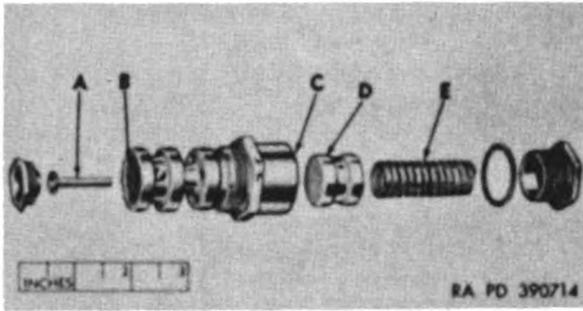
Repair and rebuild standard points of measurement for oil pressure control valve assembly.
